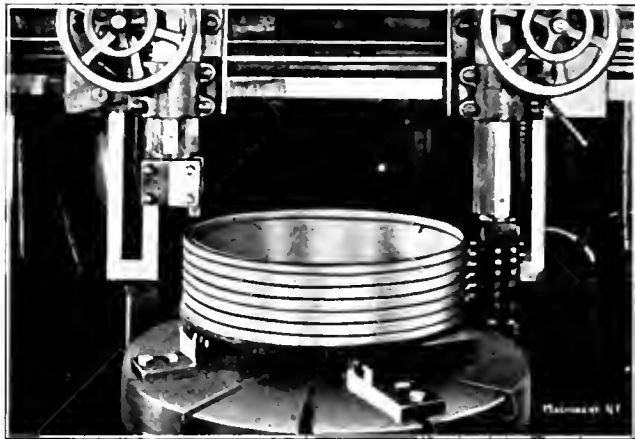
Cutting off Packing Rings with a Gang Tool which severs the Rings successively from the Top
